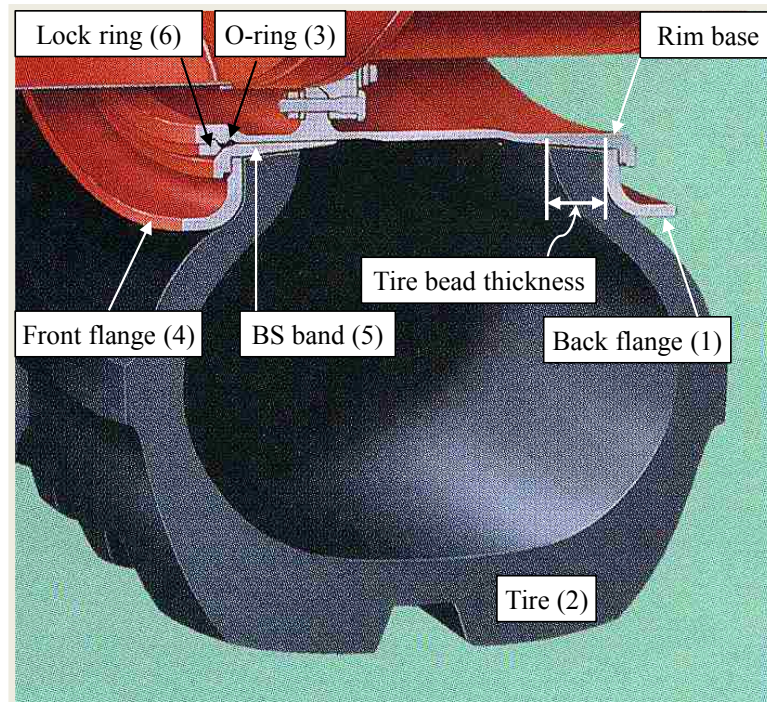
A five-piece wheel structure and tire mounting sequence [5].
